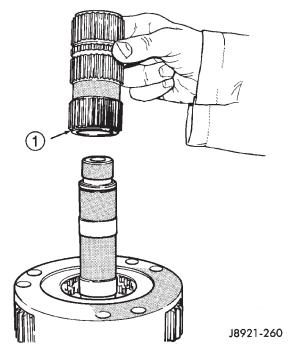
Installing Intermediate Clutch Shaft 1 – INTERMEDIATE CLUTCH SHAFT
